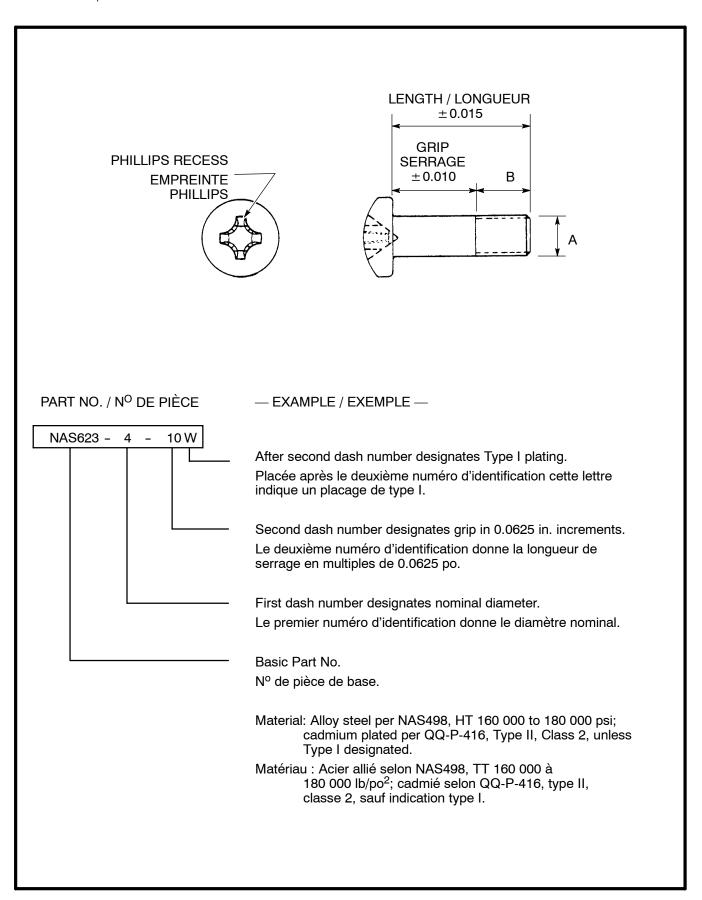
(Sheet 1 of 2) Screw, Machine, Pan Head, NAS623 Figure 6-15 (feuille 1 de 2) Vis à métaux à tête bombée, NAS623
